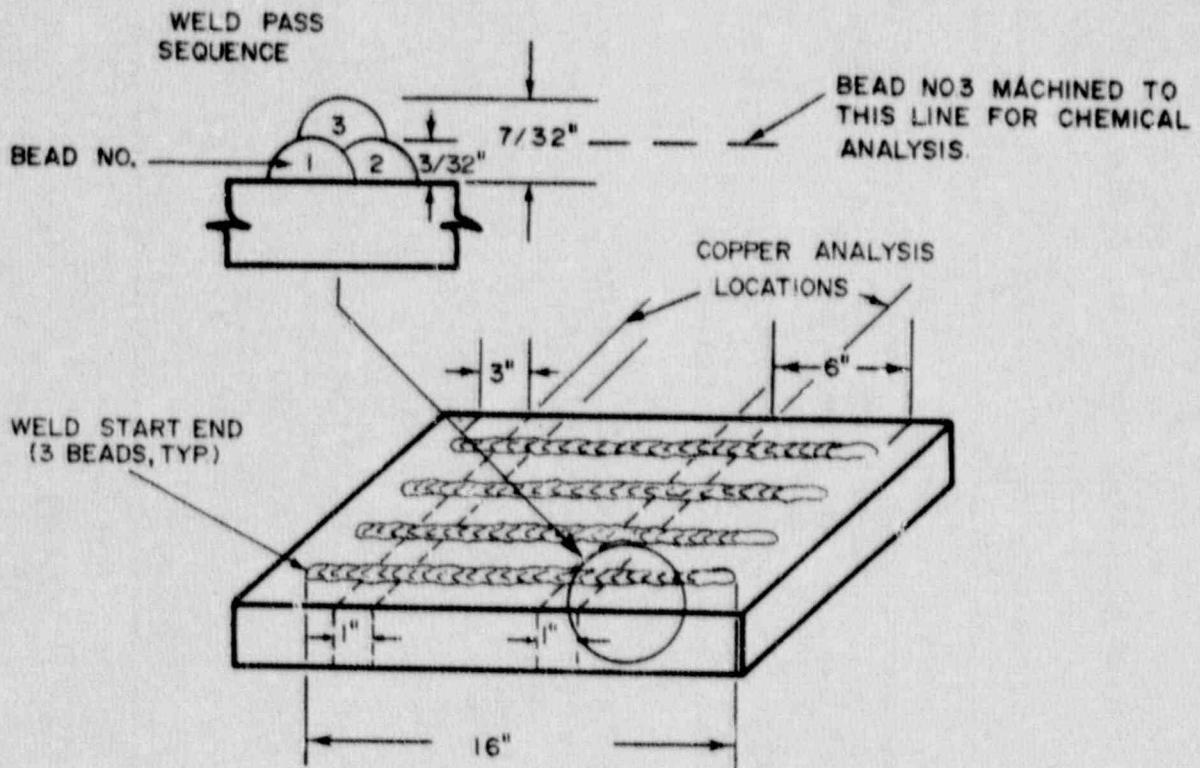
Phase 1 bead-on-plate weld tests for qualifying cold wire feed apparatus for producing a high copper content weld deposit. Analyses of bead no. 3 at the eight points shown, indicated copper contents of 0.33% or 0.34% Cu. (Note: in. x 2.4 = mm)
